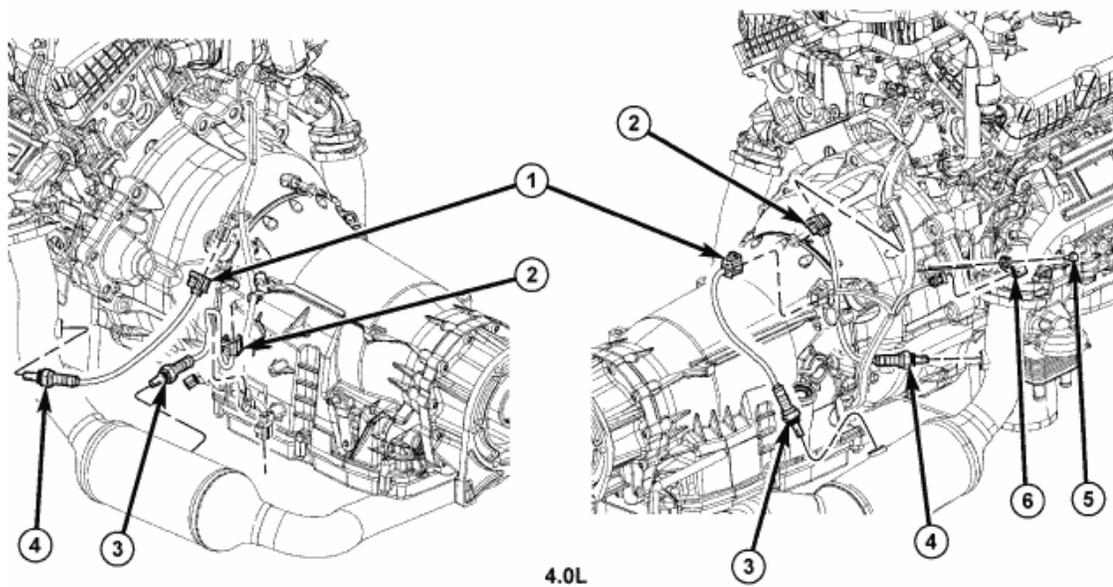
Identifying CKP/Oxygen Sensors - 4.0L
